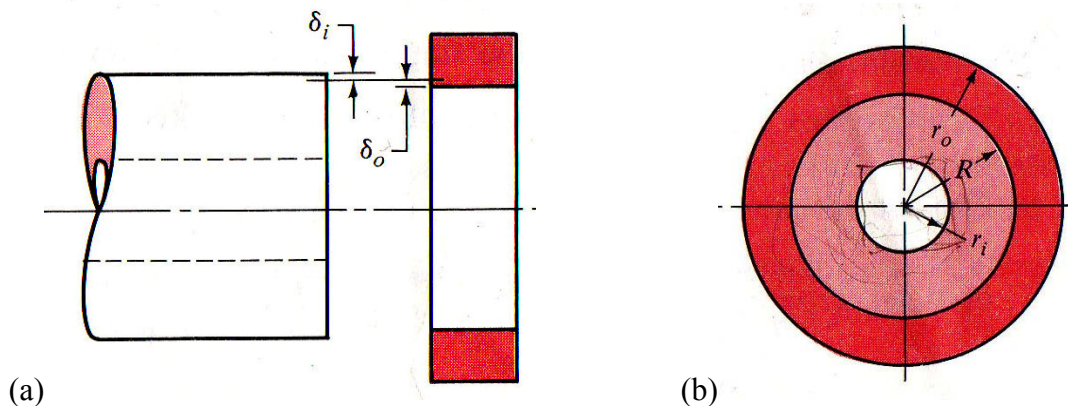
Illustration of shrink fitting showing (a) unassembled parts, (b) final assembly [24]
